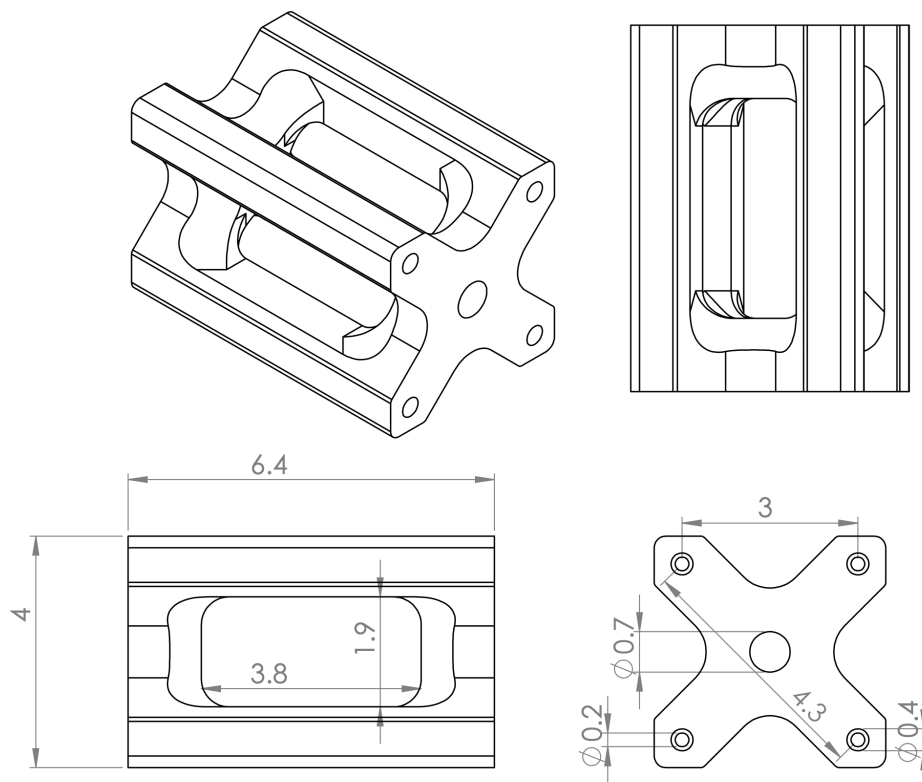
A drawing of the cavity spacer. All dimensions are given in units of cm. The spacer was machined from a single piece of Zerodur. The spacer is supported by four rods at the midpoint of the cavity. The holes for the support rods are symmetric on both ends of the spacer for common mode rejection of vibration. The angled cutouts on either end of the cavity allow for better optical access for the angled MOT beams.
